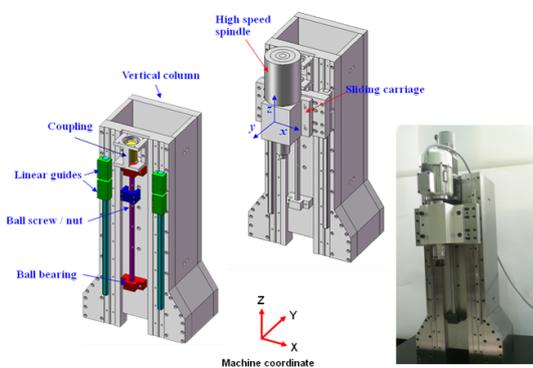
Schematic of the vertical milling machine, including column frame, feeding mechanism and spindle head associated with the spindle unit.
